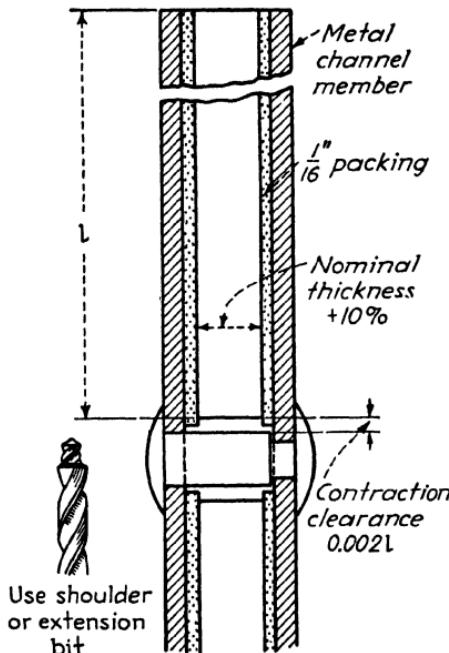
Shoulder rivet mounting requires separate drilling of metal members.
